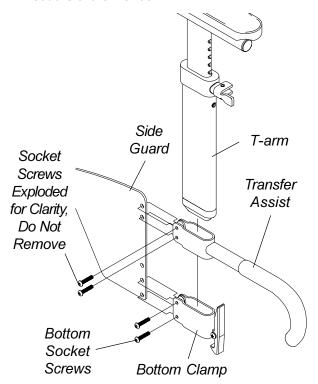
ADJUSTING THE TRANSFER ASSISTS AND/OR SIDE GUARDS - T-ARMS
